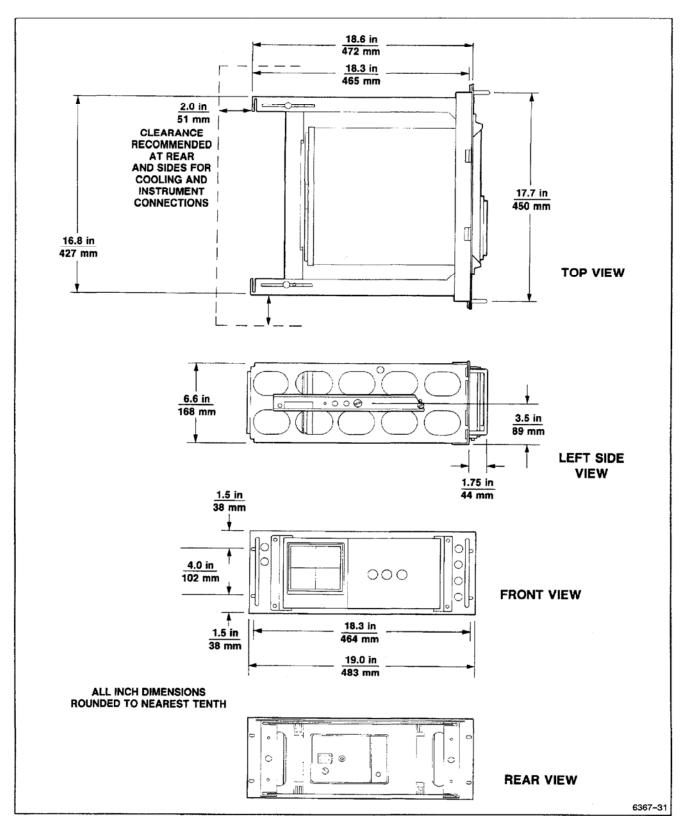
Dimensional outline drawing, rackmount cabinet.
